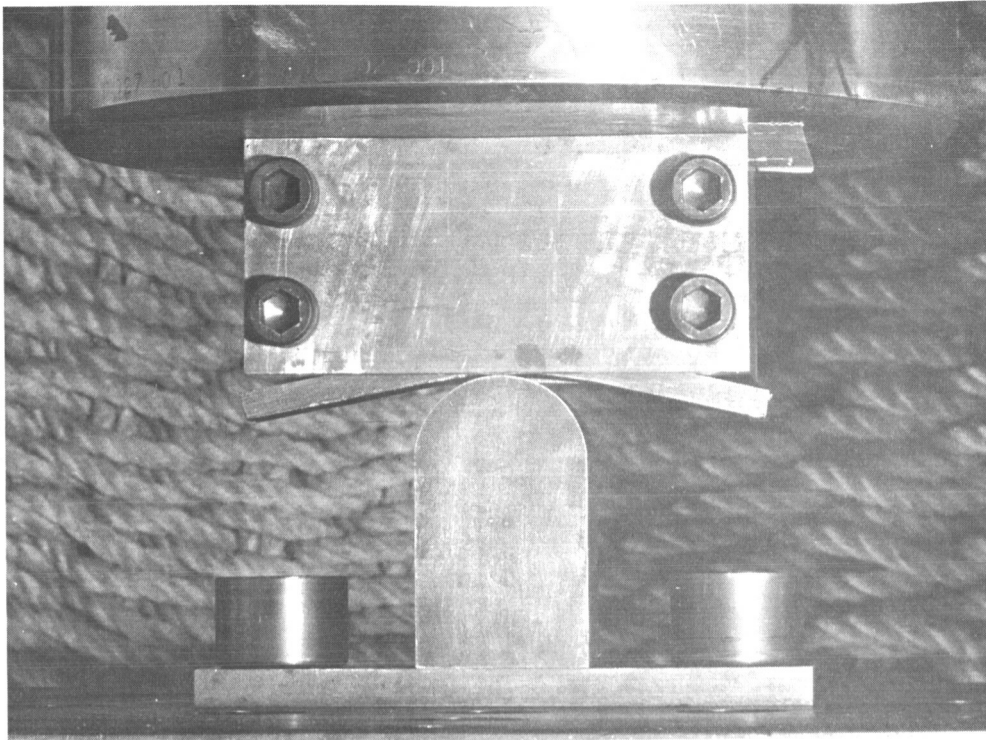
Plate Bend Test Fixture and Typical Bend Tested Weldments
